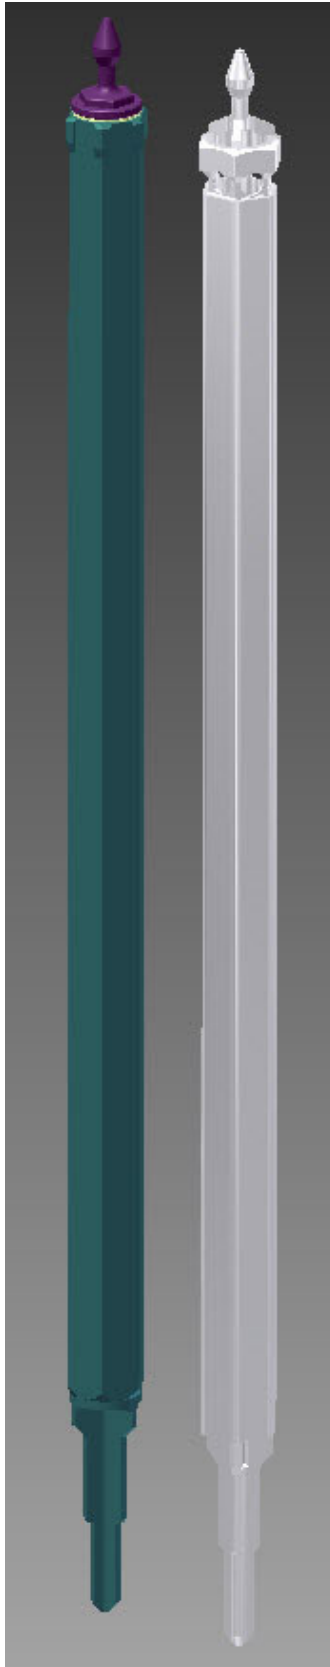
View of the sample cassette next to a fuel assembly, right.
